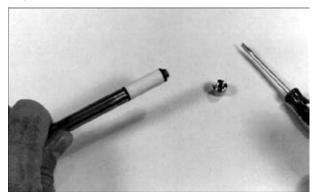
through 28 show the successive operations in mounting the parts on the stem of the Probe.
